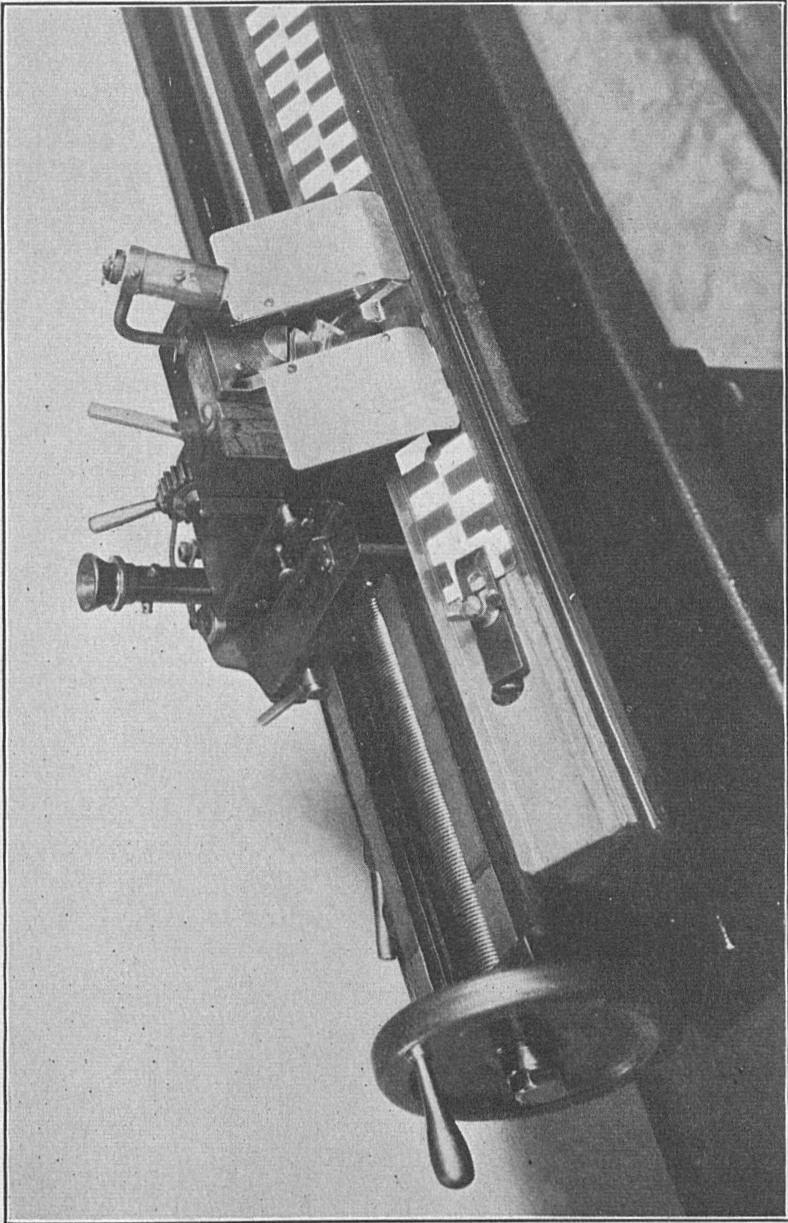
Detailed view of traversing carriage and painting mask.
